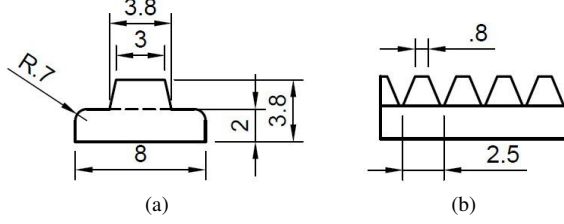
Flexible rack dimensions in mm units; (a) front view and (b) side view.
